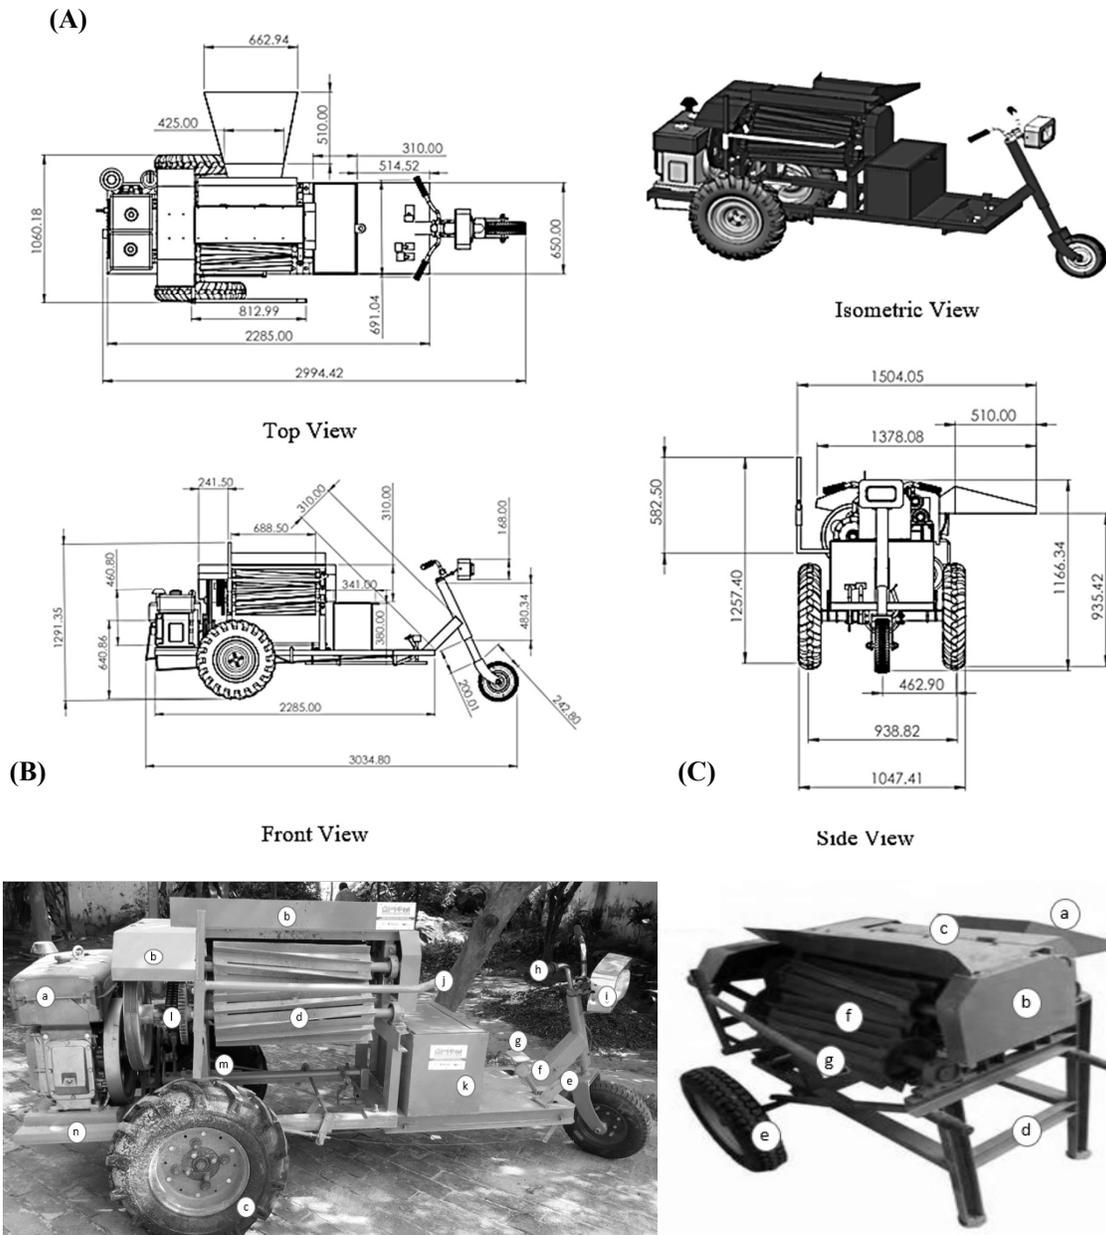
(A) a schematic diagram of Aashkol, (B) the developed Aashkol; a. Engine; b. Protection Cover; c. Wheel-Two Types; d. Extraction Roller; e. Throttle Lever/Accelerator; f. Brake; g. Main Clutch; h. Handle; i. Head Light; j. Fiber receive stand; k. Seat cum toolbox; l. Sprocket; m. Differential gearbox; n. Base Frame , and (C) imported KP model jute extraction machine (C); a. Feeding tray, b. Side protection cover, c. Top protection cover, d. Base frame, e. Wheel, f. Secondary extraction roller, g. Fiber receive stand.
